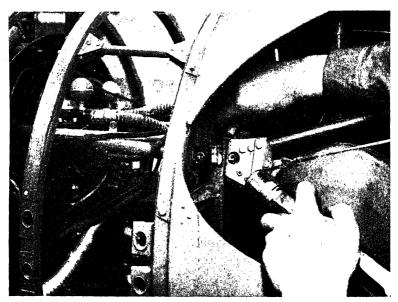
Inspect c/planes and engine nacelles and mountings (2). Checking engine bearer attachment bolts for tightness.
